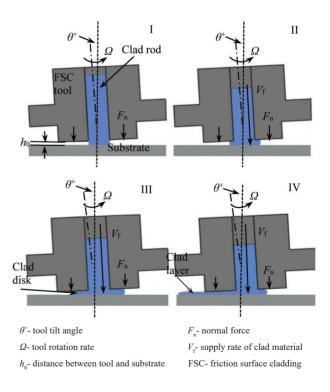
Schematic diagrams of coating preparation by friction stir welding^[100]
